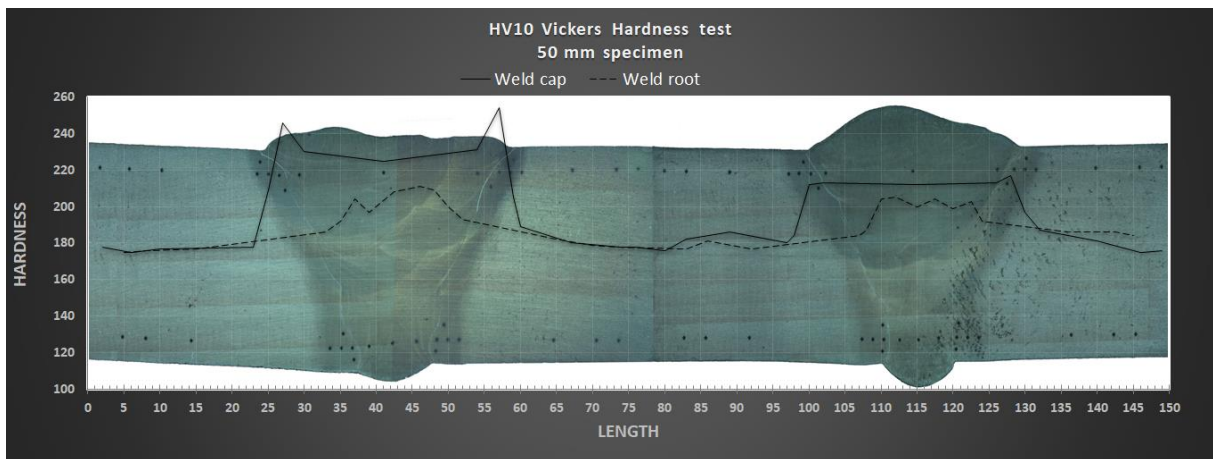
HV Vickers Hardness Test 44 mm between the welds.
